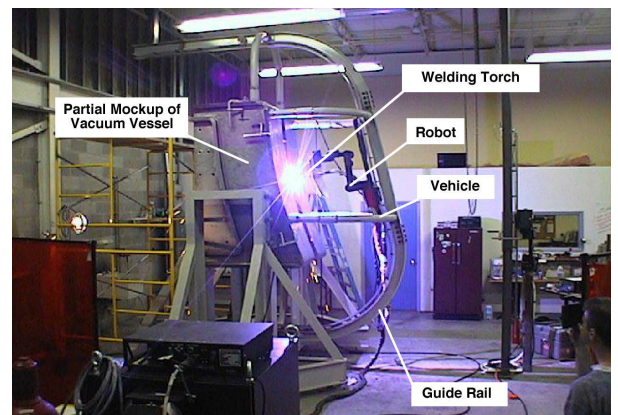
Fully Remote Welding/Cutting Equipment for Vessel and Ports
